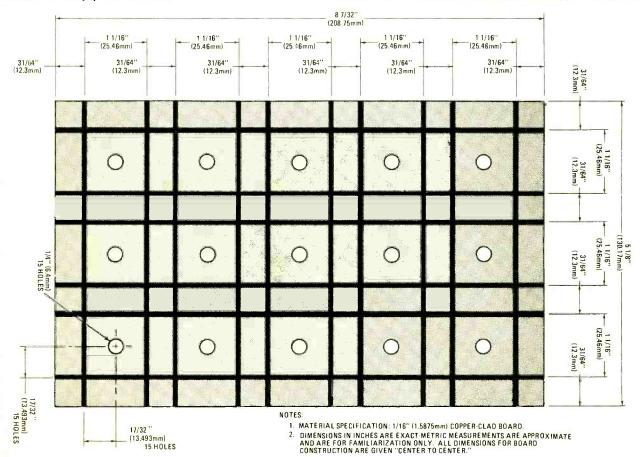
PRINTED CIRCUIT LAYOUT for the Electronic Slot Machine, shown half size.
